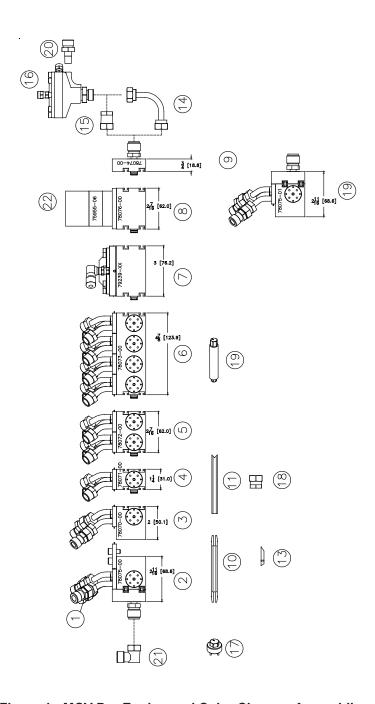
MCV Pre-Engineered Color Changer Assemblies
